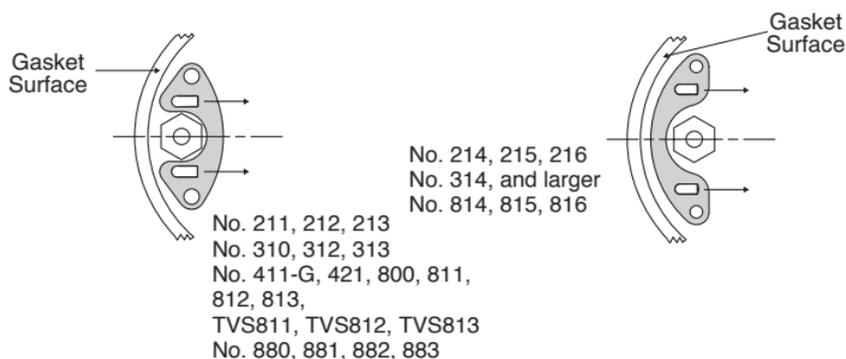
Guide Pin Plate Locations. Pins always point away from adjoining Gasket Surfaces.
